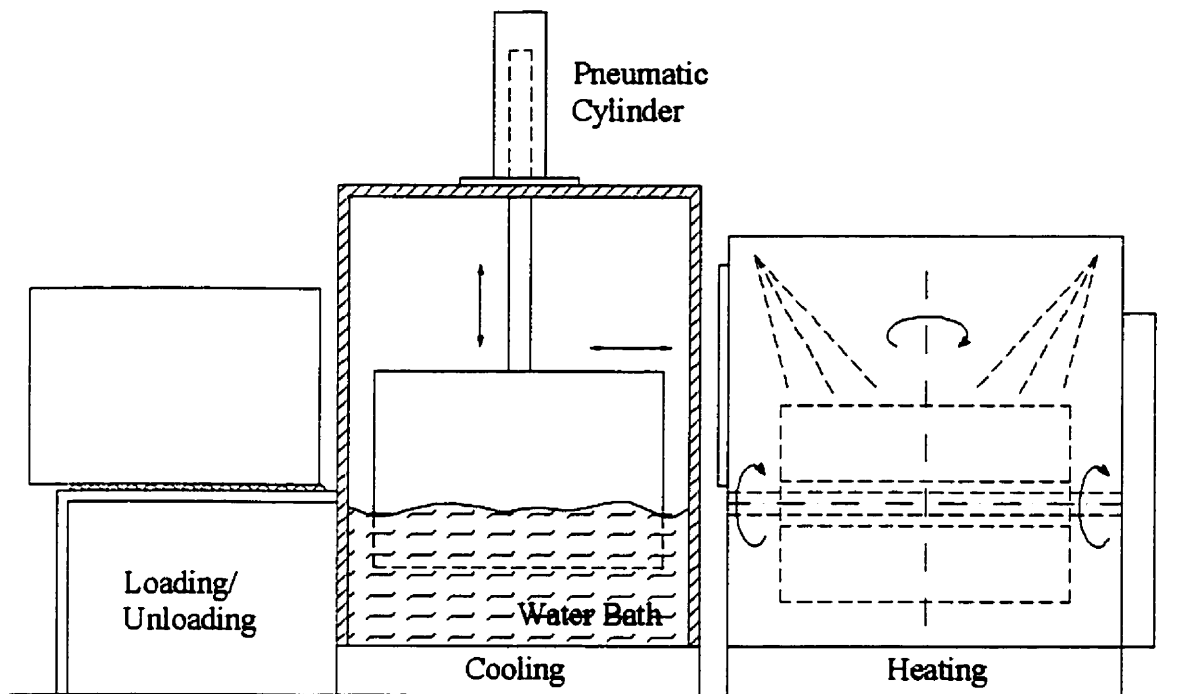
Schematic of the Open-flame Mold Heating Concept Applied on a Rock and Roll Rotomolding Machine
